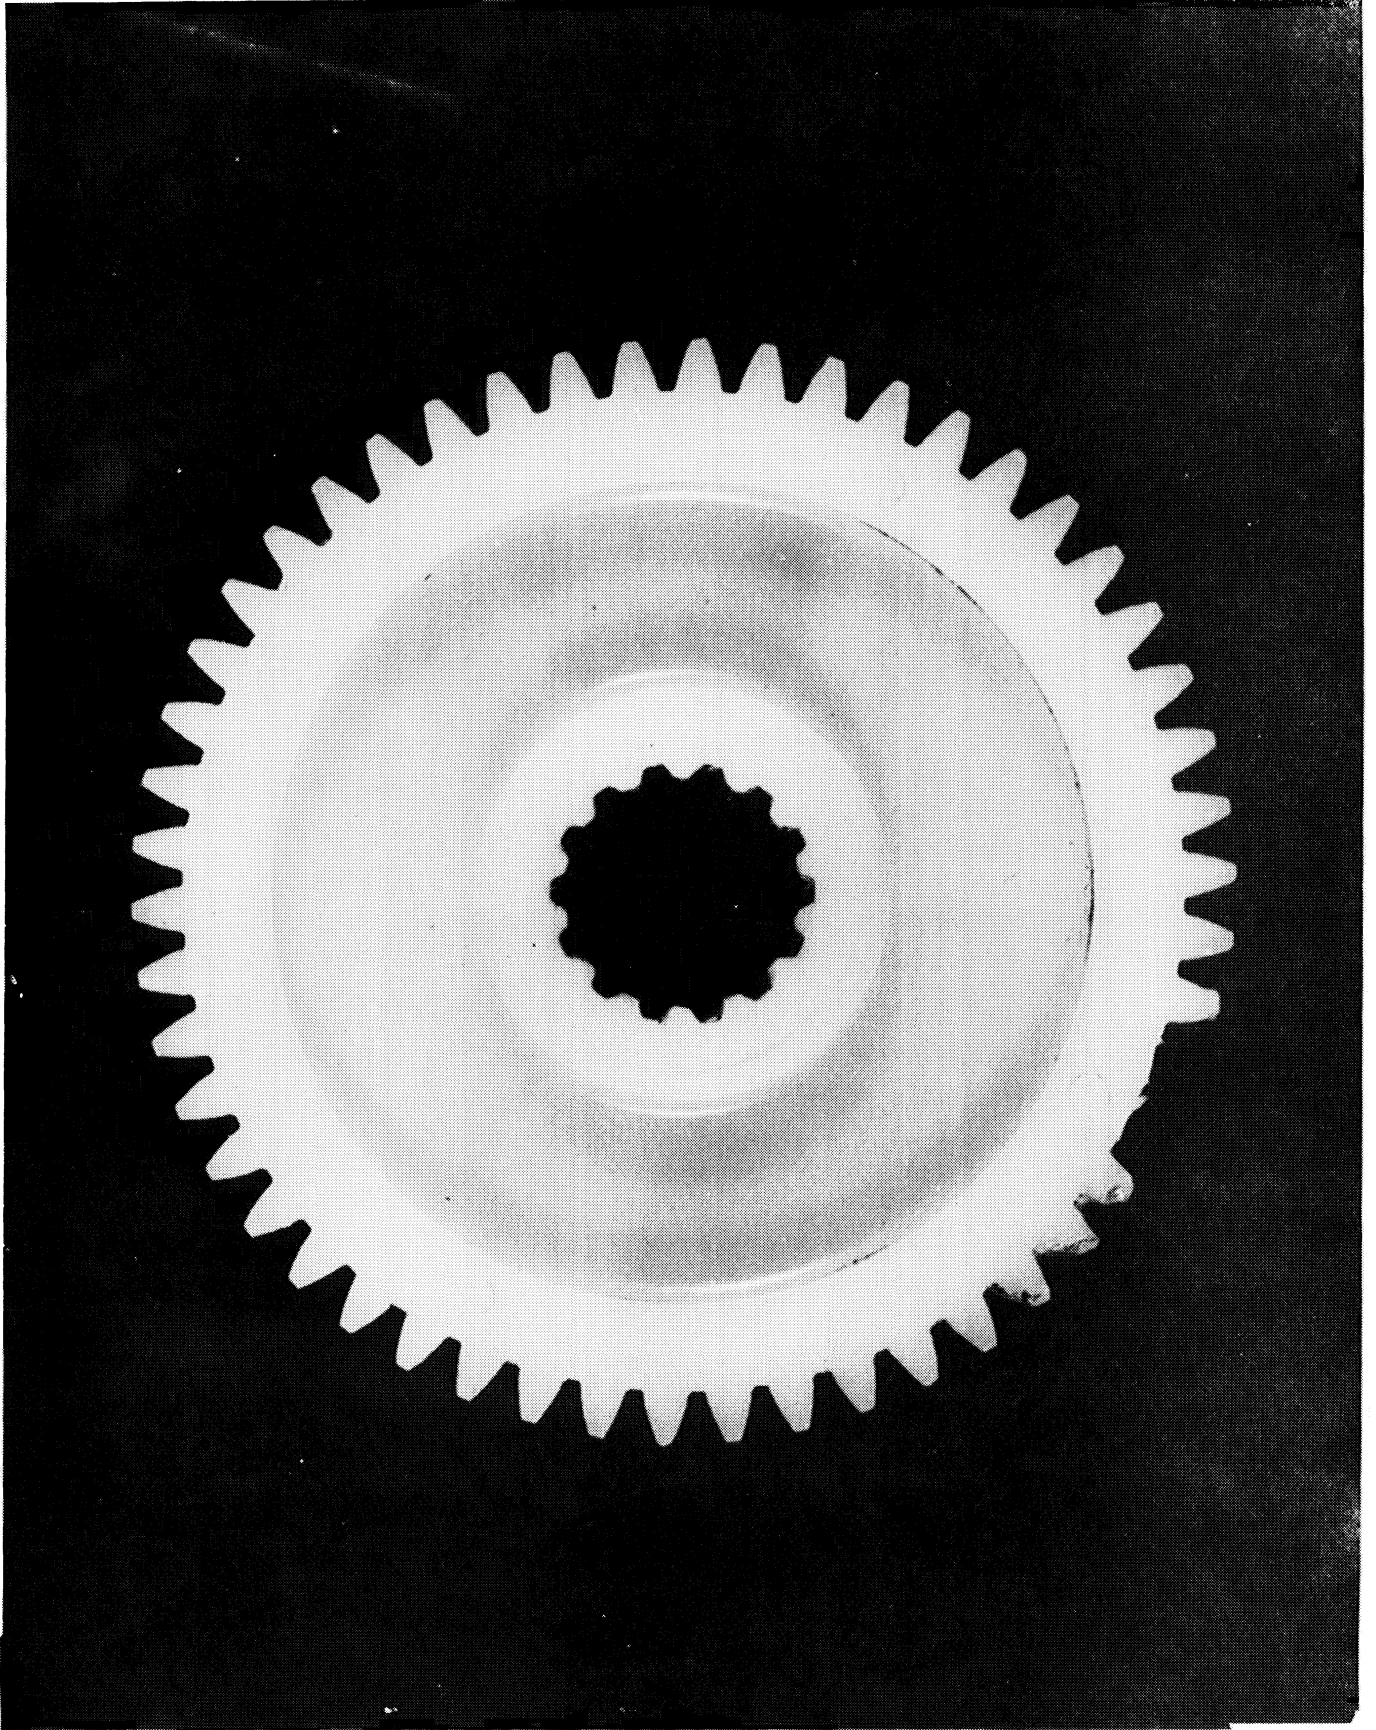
Fatigue Failure of 20 Pitch Molded Gear Teeth, Annealed
